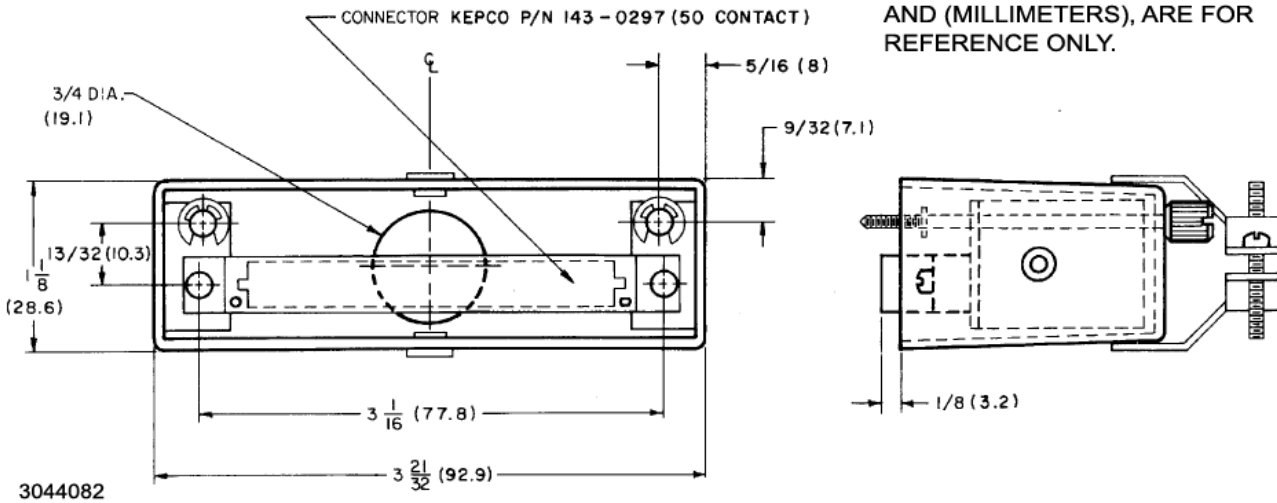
MECHANICAL OUTLINE DRAWING, MODEL PC 15
